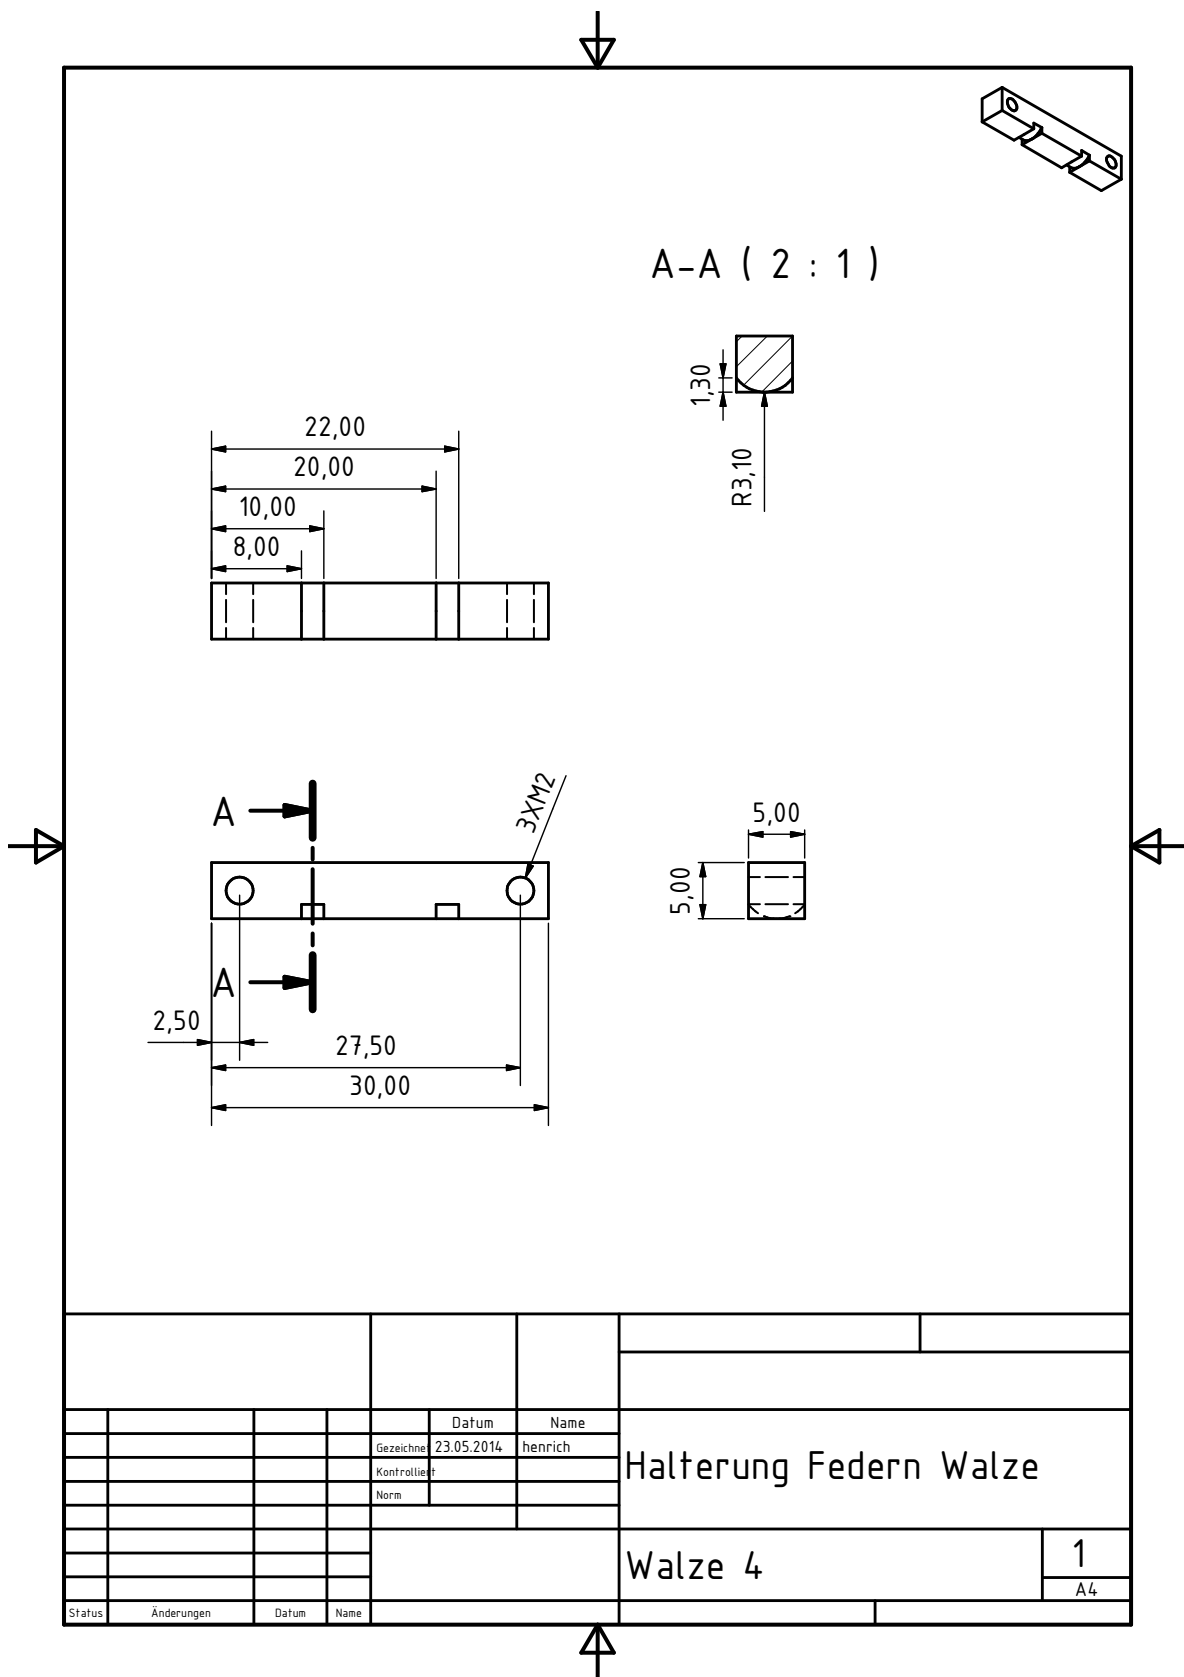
Technical drawing of the spring holder conneted directly to the drum
